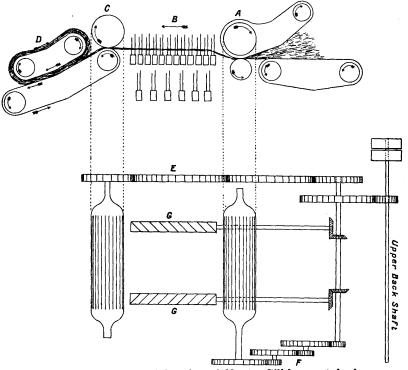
Plan and Elevation of Sheeter Gill-box. A, back rollers; B, fallers set with pins (gills); C, front rollers; D, sheeting leathers; E, train of wheels driving front rollers; F, train of wheels driving back rollers; G, screws driving the fallers or gills.
